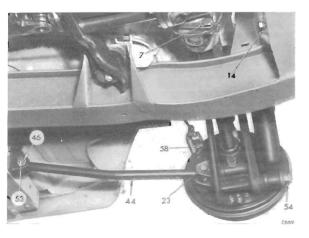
Radius rod attachments (Herald 1200, 12/50 and Vitesse)
